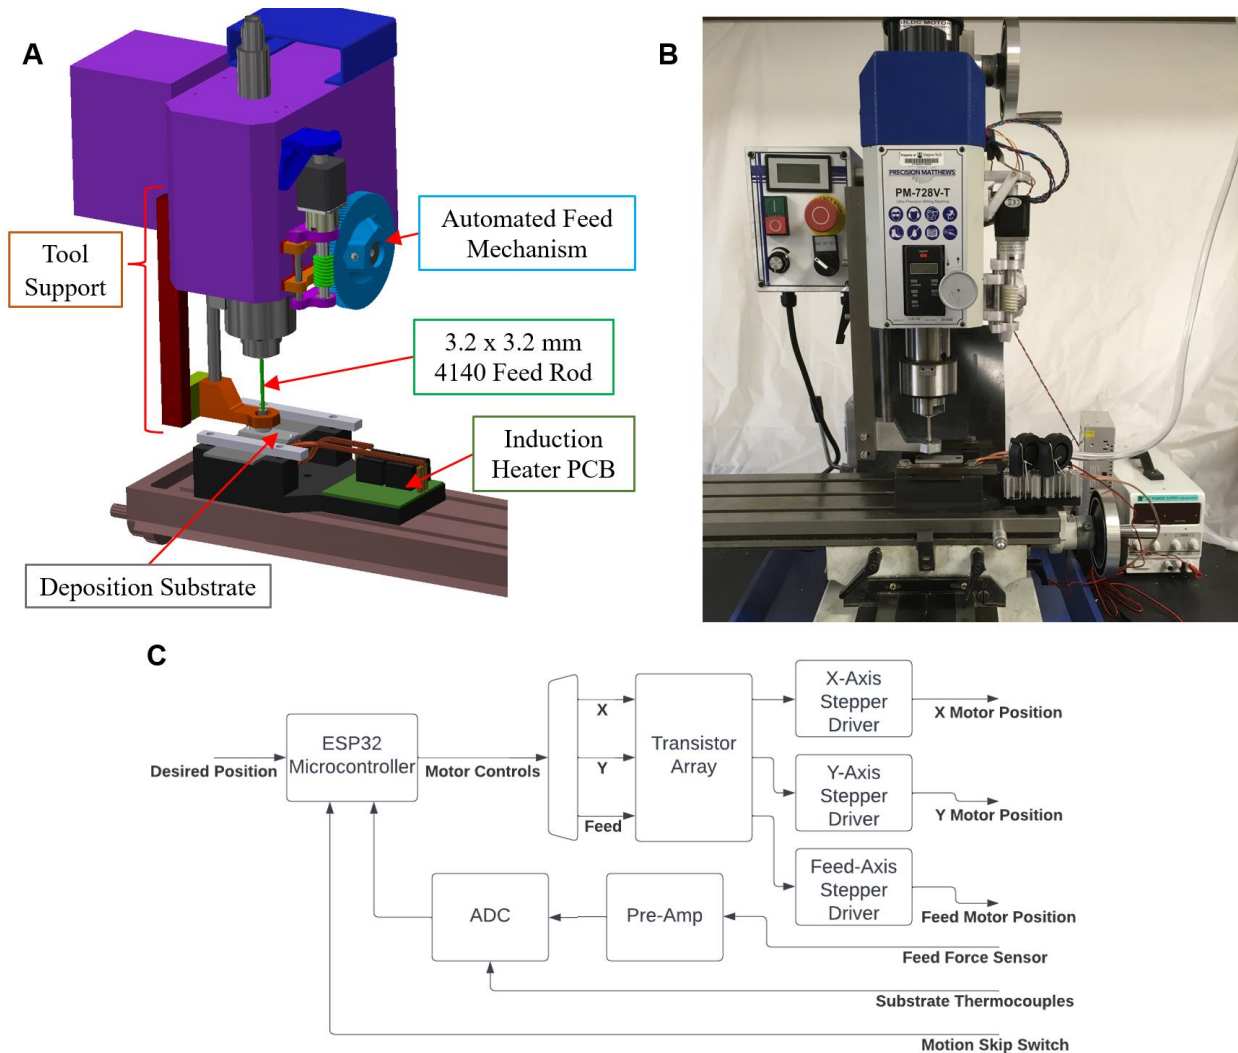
(A) A schematic and (B) a picture of the instrumented desktop mill for miniaturized solid-state metal additive manufacturing. (C) Block diagram of the electrical components of the modified milling machine.
